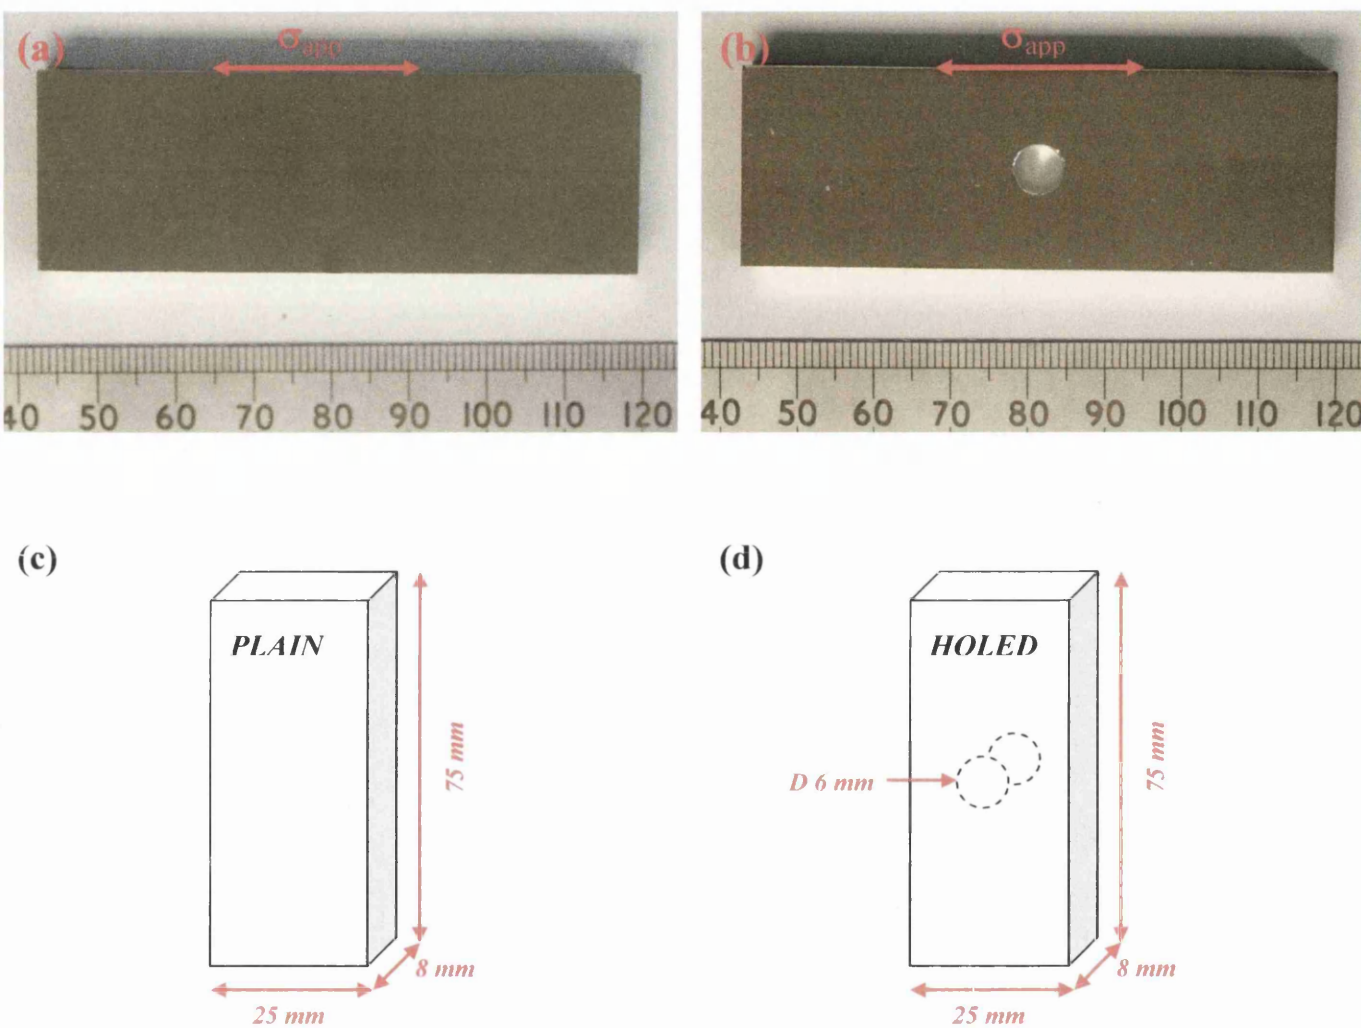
Schematic drawing of the tensile test specimen with dimensions in millimetres (Not to scale).
